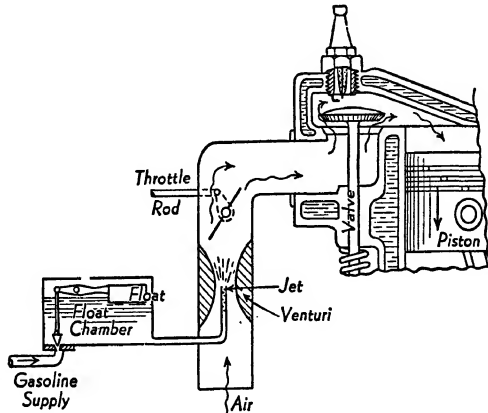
Induction system of the gasoline engine showing elementary form of carburetor.
